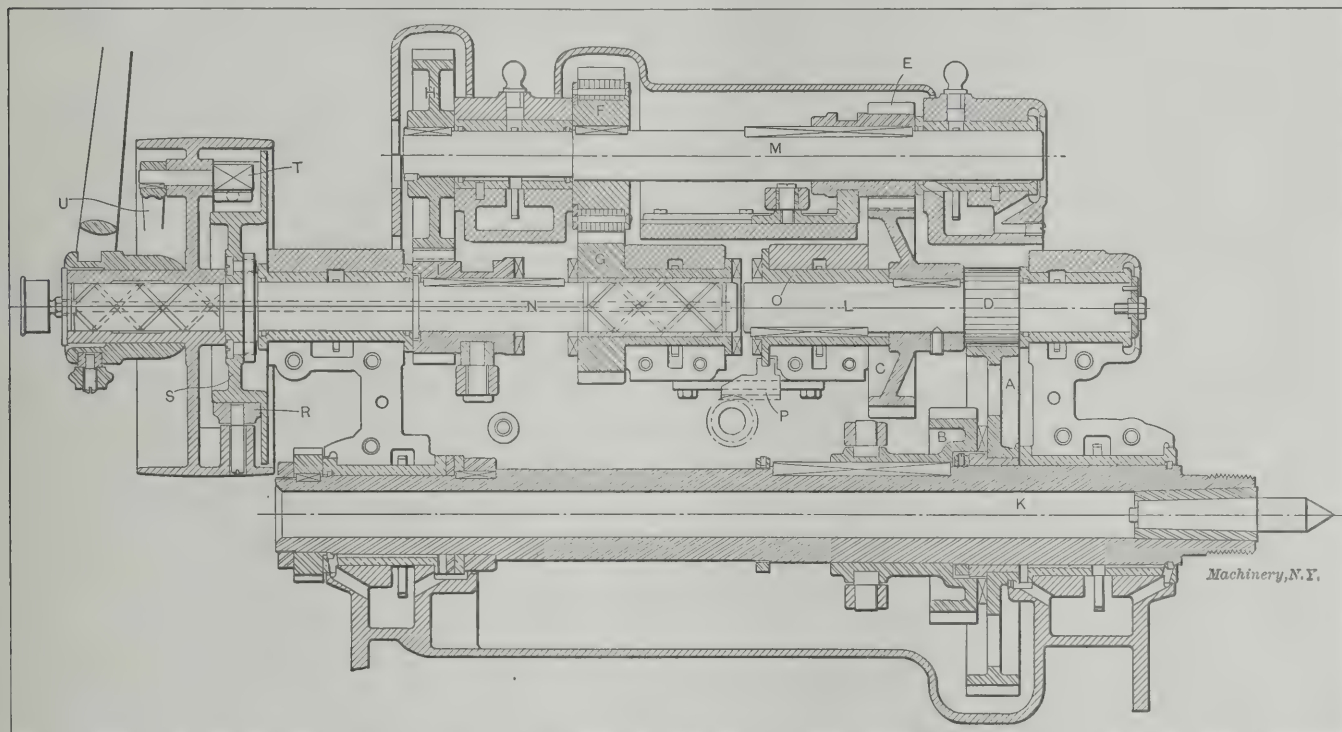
Section of Head-stock, showing Geared Drive of Norwegian Lathe
